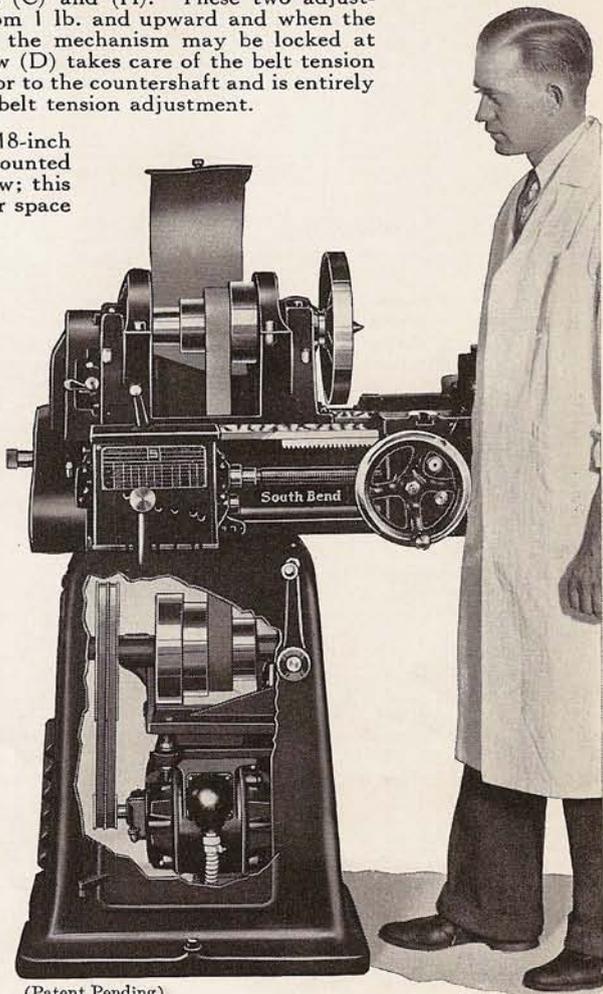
End view of lathe with end plate removed to show multiple "V" belt drive from motor
